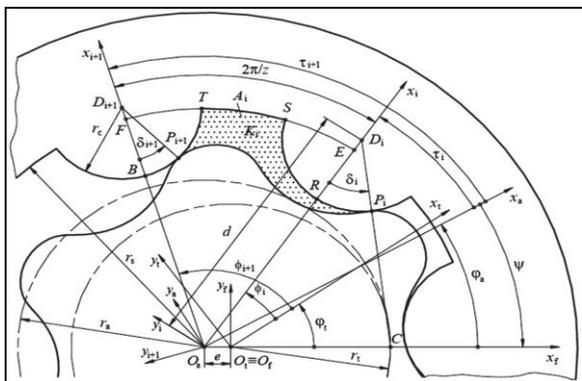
Schematic of Gear Pair with Basic Geometrical Dimensions
